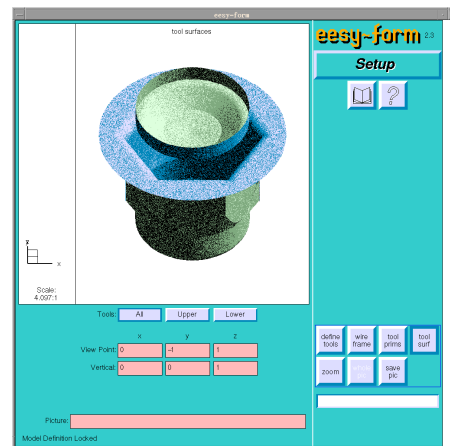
ref. Part: Tooling (tool surface - 3D view)
